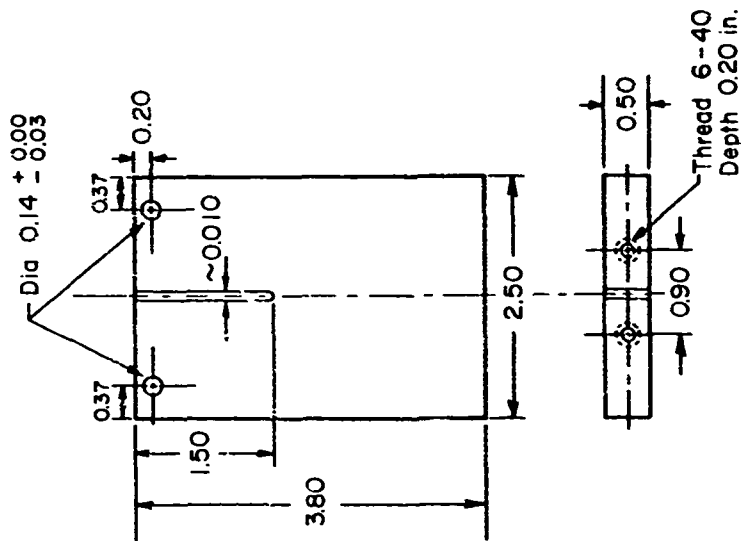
CANTILEVER FRACTURE TOUGHNESS SPECIMEN
